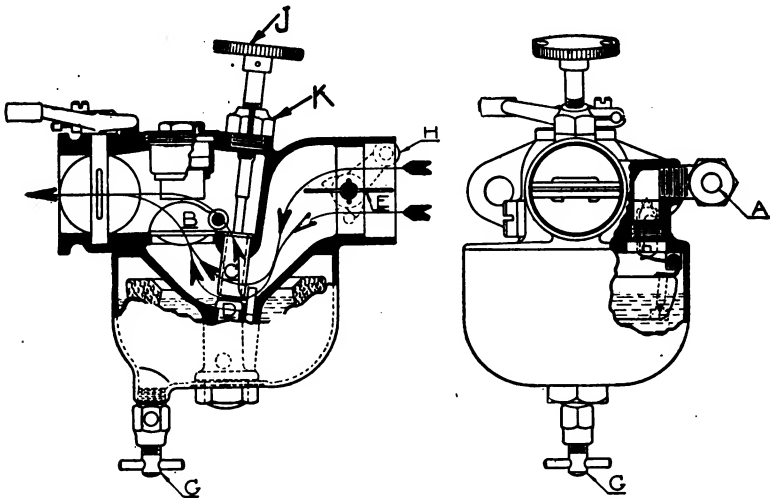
Drawings Showing Construction of Kingston Model "L2" Carburetor
